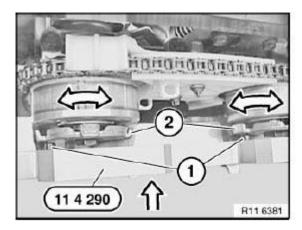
Identifying Sensor Gears And Pins Courtesy of BMW OF NORTH AMERICA, INC.
